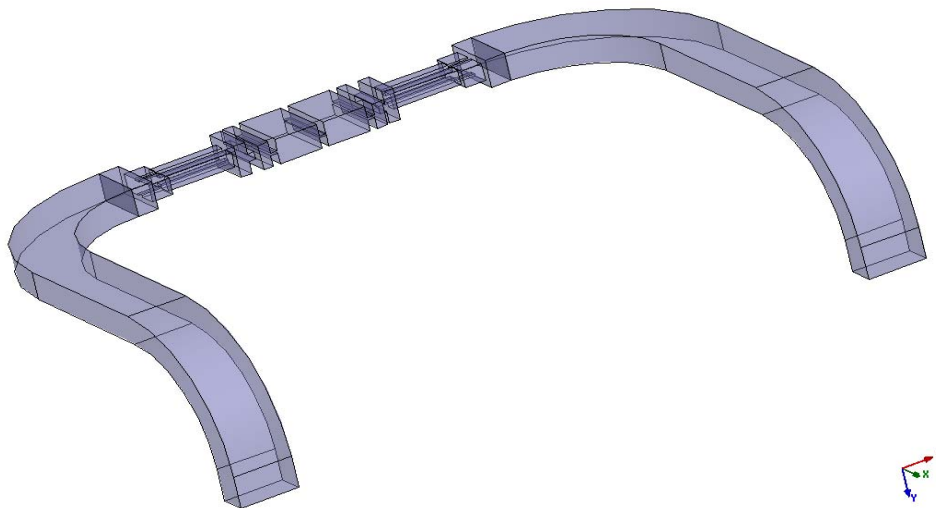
Filter of Fig. 4 embedded within a possible waveguide assembly.
